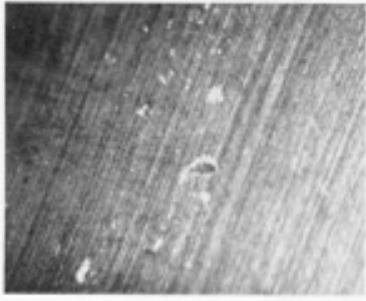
Ball bearing raceway denting caused by hard particle contaminant. 15×
